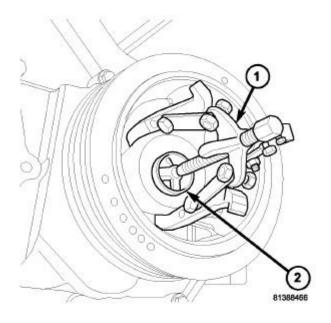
VIBRATION DAMPER REMOVAL Courtesy of CHRYSLER LLC
